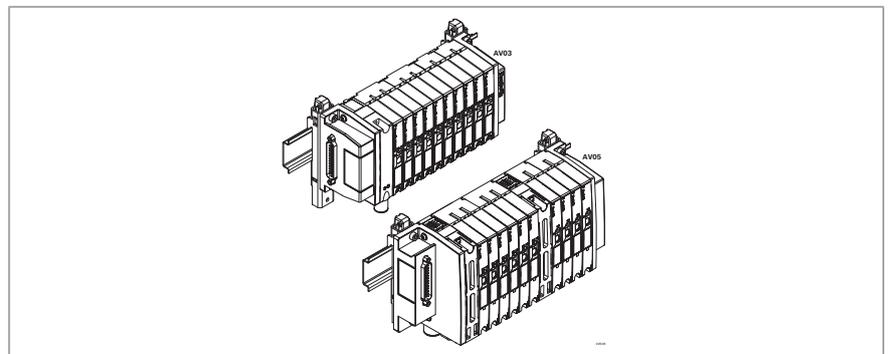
Mounting of the valve system on a hat (DIN) rail, example: AV03 and AV05 series (note the limited number)
